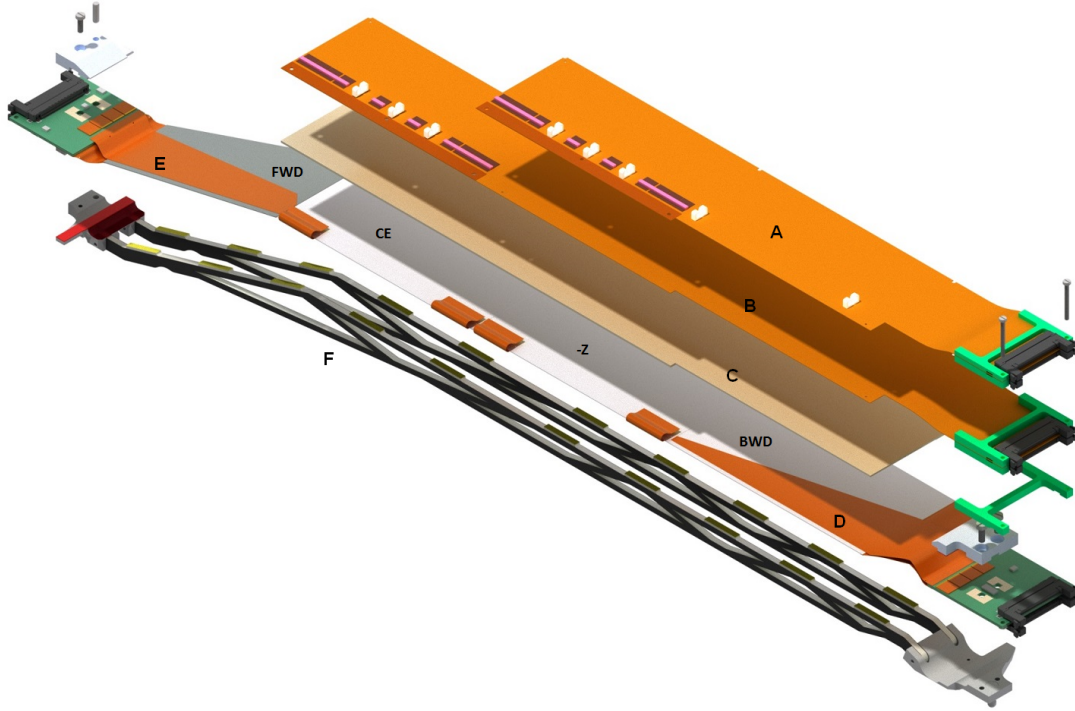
Explosion view of the L5 ladder. (A) flexible PCB for -Z sensor, (B) flexible PCB for CE sensor, (C) Thermal insulator sheet, (D) backward sensor with flexible PCB connected to a read out PCB, (E) forward sensor with flexible PCB connected to a read out PCB, (F) carbon fiber ribs with protruding edges on top [7]
